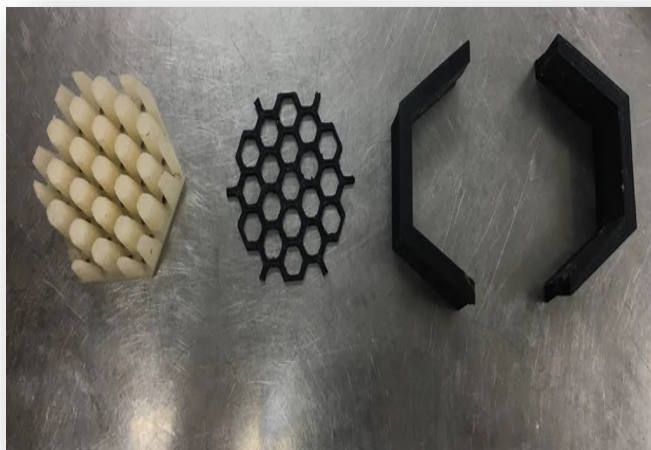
Beehive honeycomb mould, press and frame produced using 3D printer (left to right)
